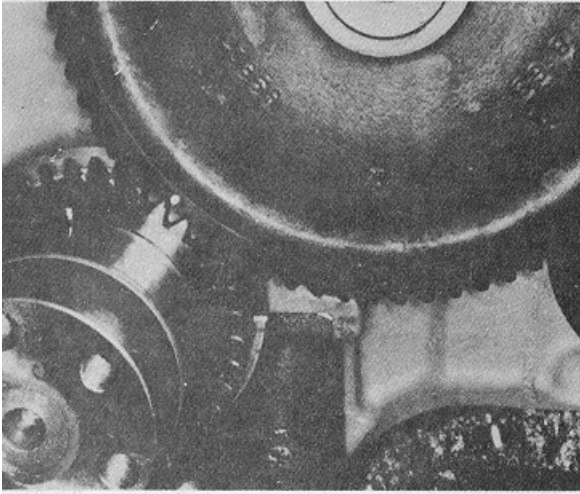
, (N114167). Timing marks on camshaft and crankshaft gear
